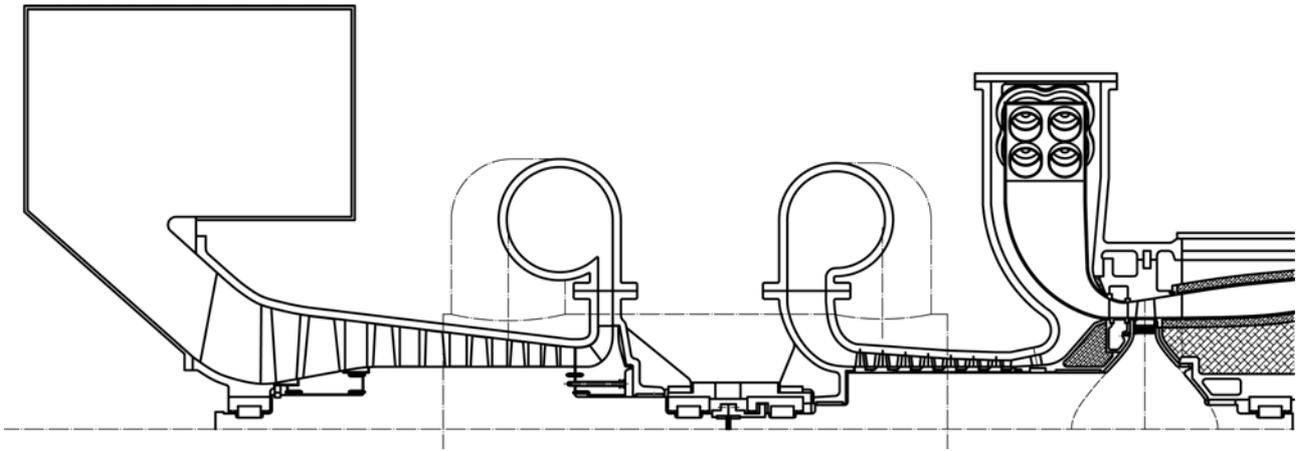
Design of high speed shaft consisting of compressors C1 and C2 and compressor turbine HTTC
